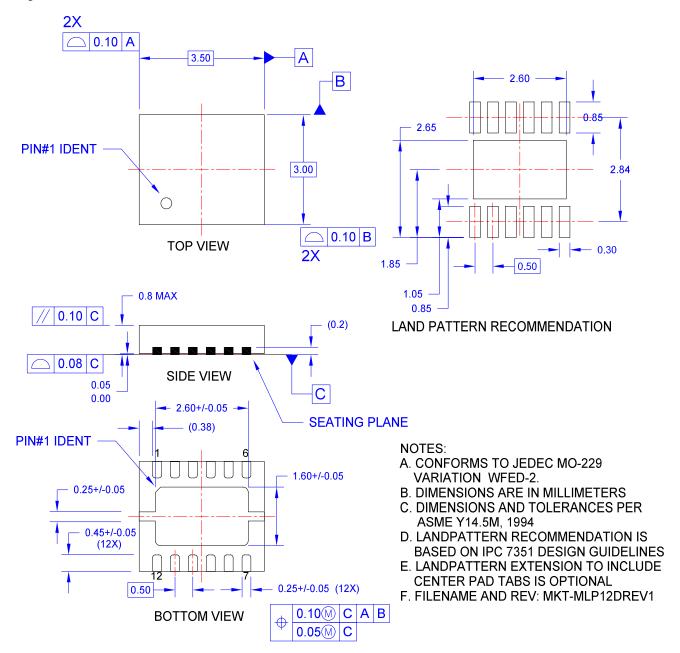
12-Lead, 3x3.5mm Molded Leadless Package (MLP)
